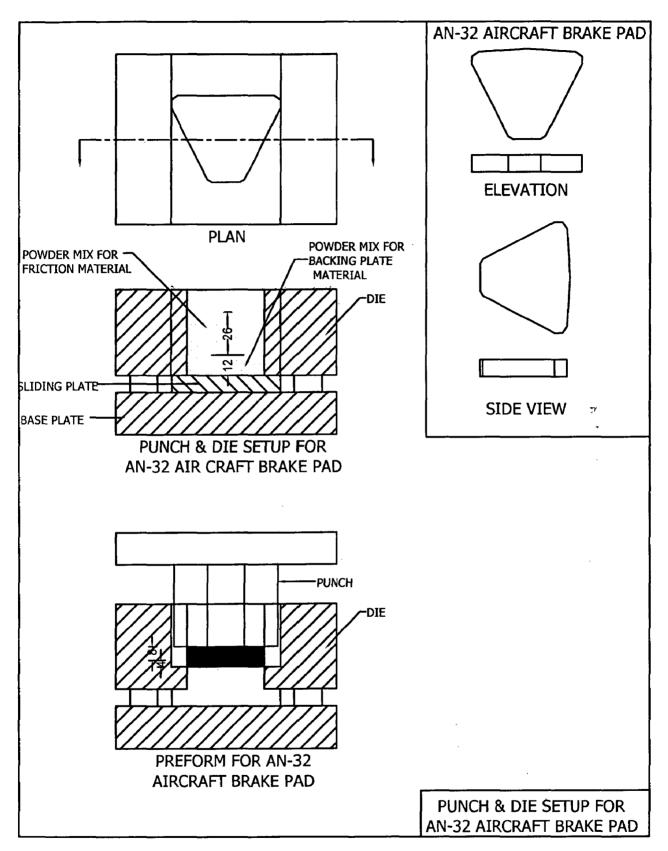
Punch & die setup for AN-32 aircraft brake pad
